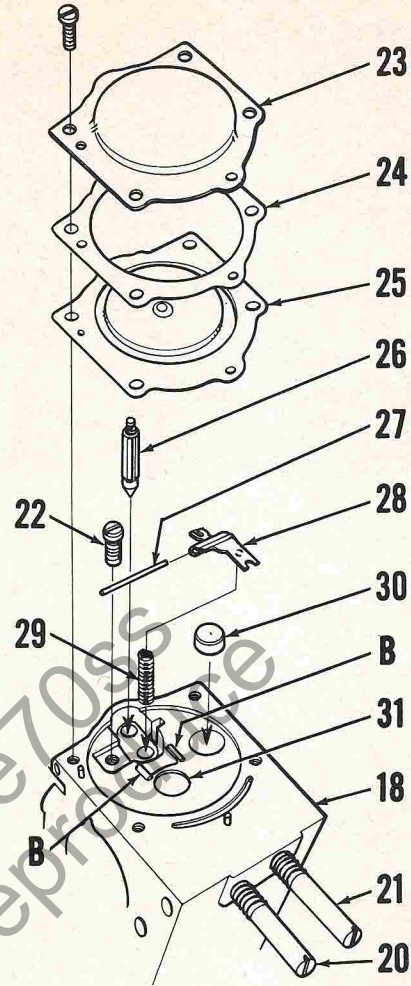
Bottom view of carburetor showing exploded view of metering diaphragm, lever and inlet valve assembly. Refer to Fig. HL101 for exploded view of other carburetor parts.
